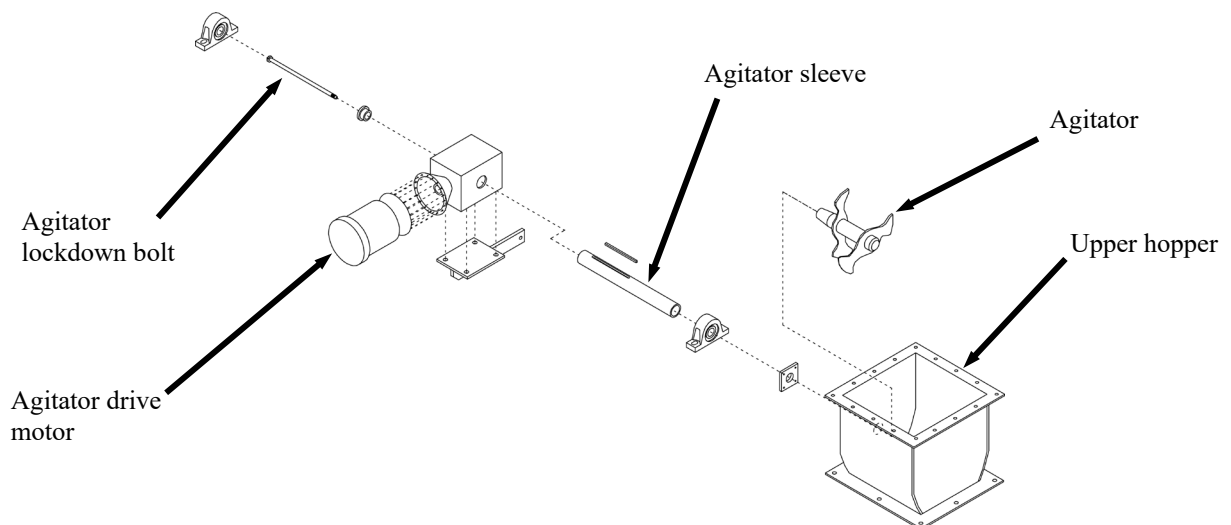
Optional Electric Agitator Assembly, Exploded View
